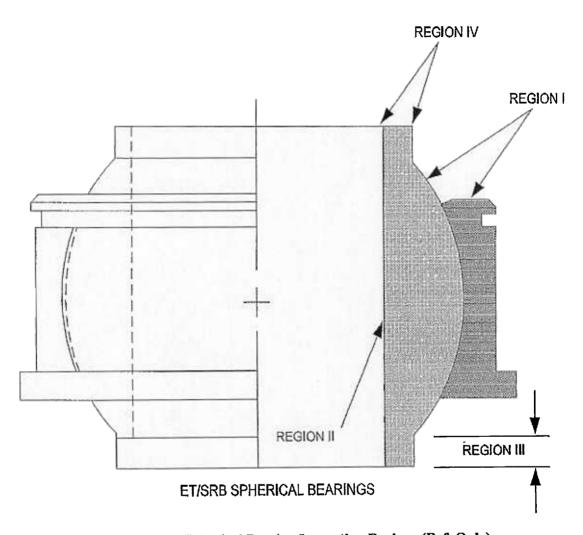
ET Spherical Bearing Inspection Regions (Ref. Only)
